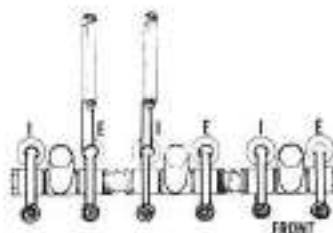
With No. 1 piston on TDC exhaust stroke on three-cylinder engines, adjust intake valve on No. 2 cylinder and exhaust valve on No. 3 cylinder. Refer also to Fig. 38.
